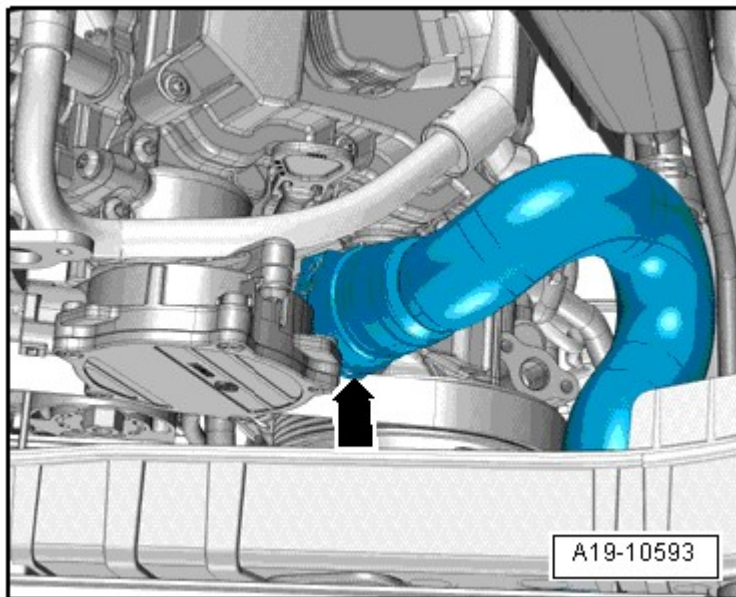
Identifying Coolant Hose From Front Coolant Pipe By Lifting Retaining Clamp
